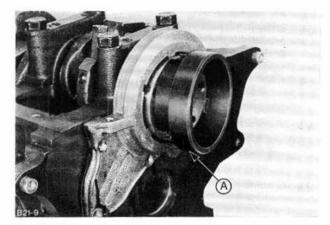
Fit rear oil seal carrier. A – Special Tool 21-029.
